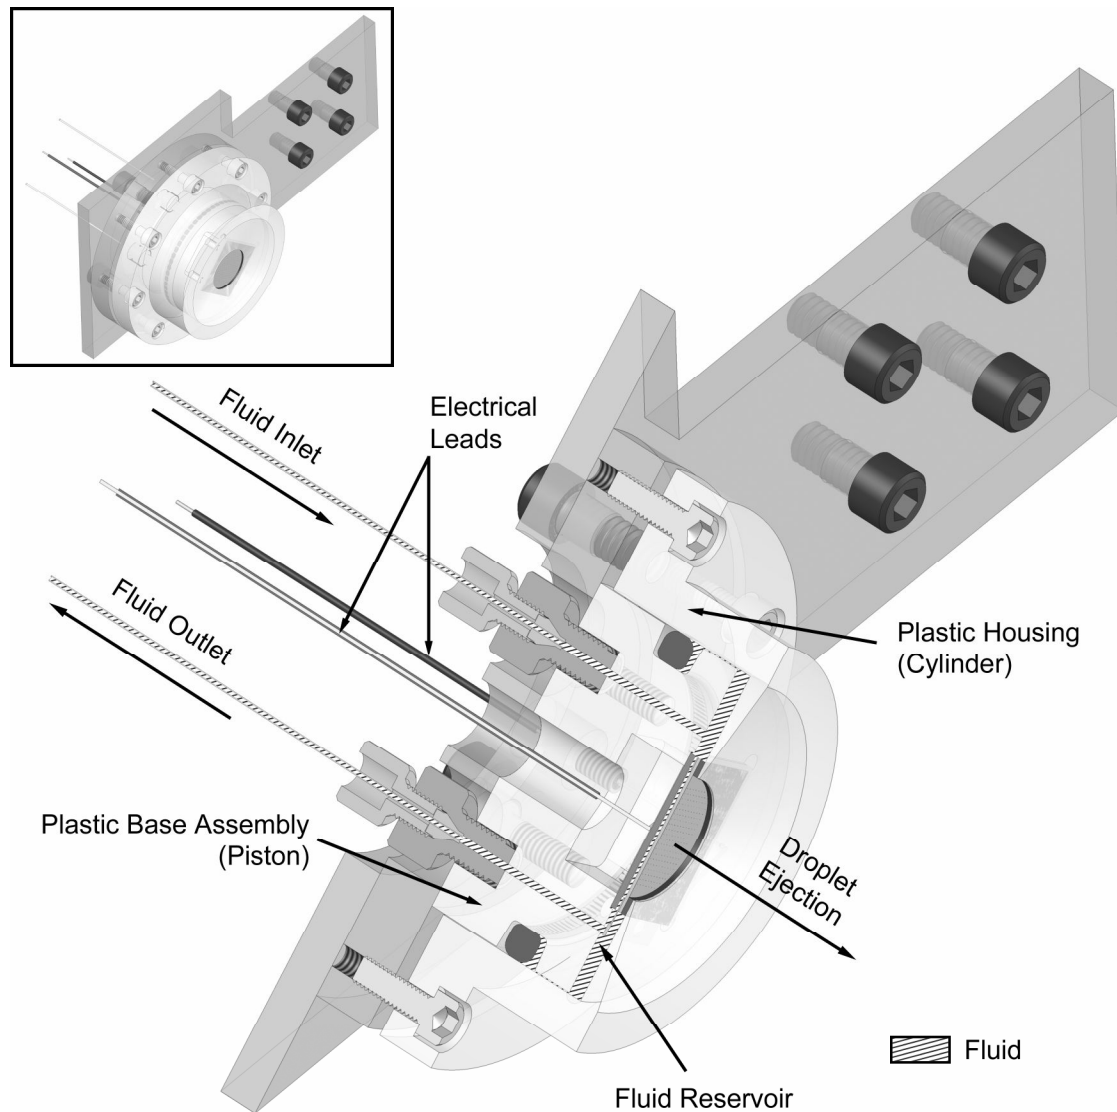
Cutaway schematic showing the cross-sectional view of the test section assembly during operation.
